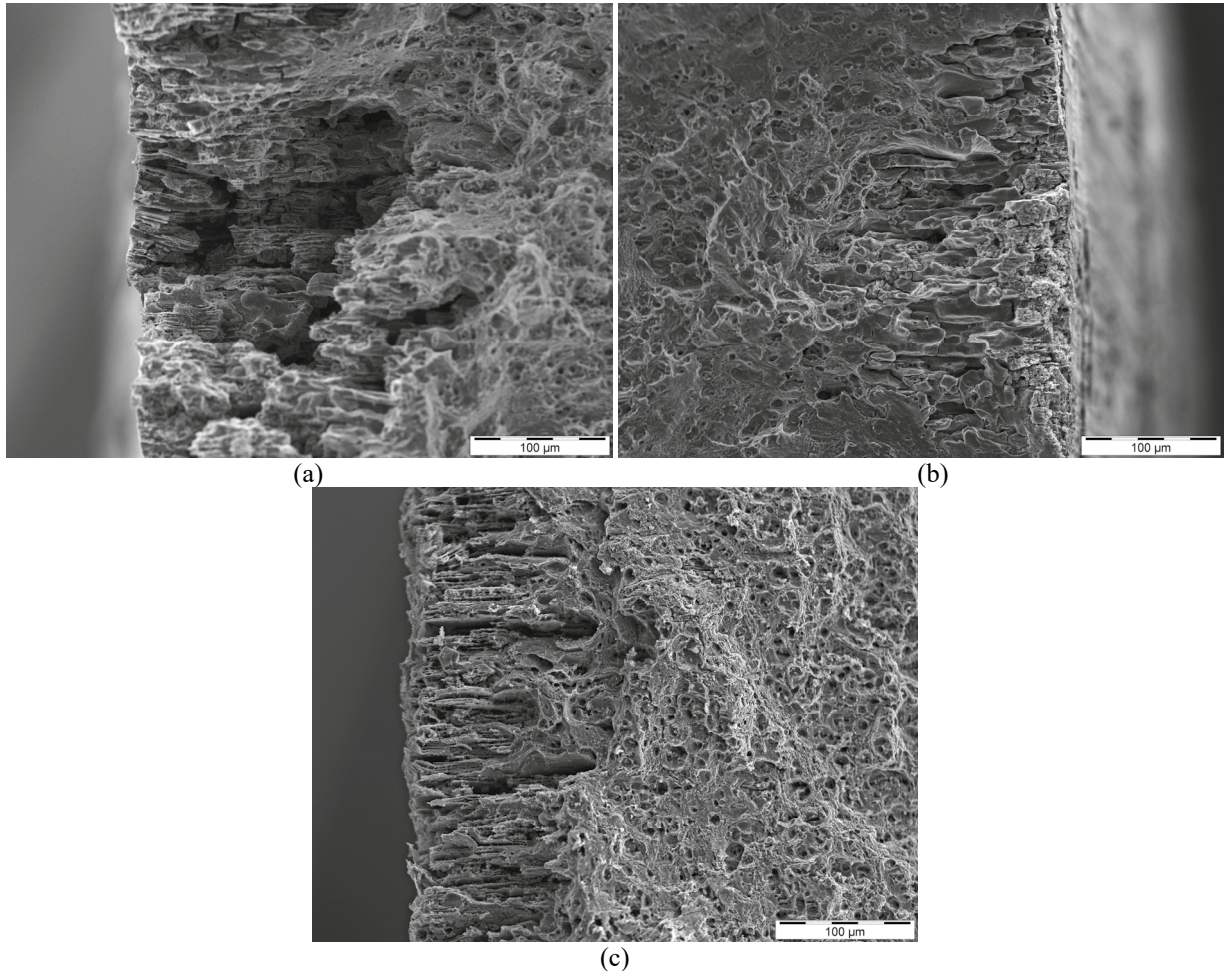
Fracture surfaces of AA2024 tensile specimens for different artificial ageing conditions: at (a) under-ageing; (b) peak-ageing; (c) over-ageing when pre-corroded for 2 h exposure to EXCO solution.
